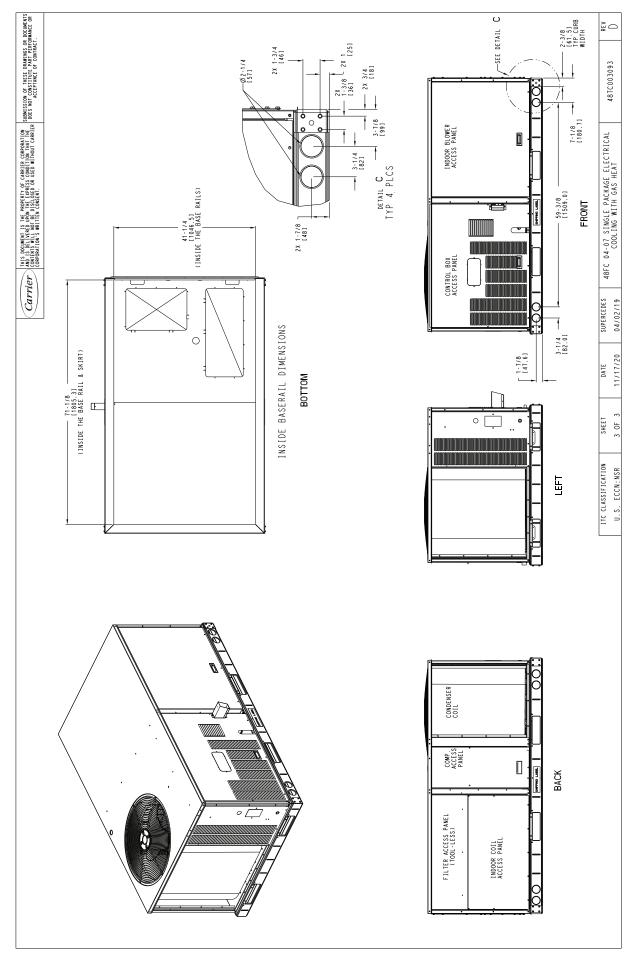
48FC04-07 Dimensional Drawing (cont)
